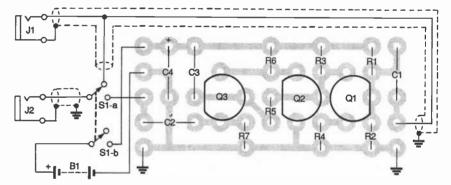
Off-board wiring could get tricky, unless you follow this parts-placement diagram.
